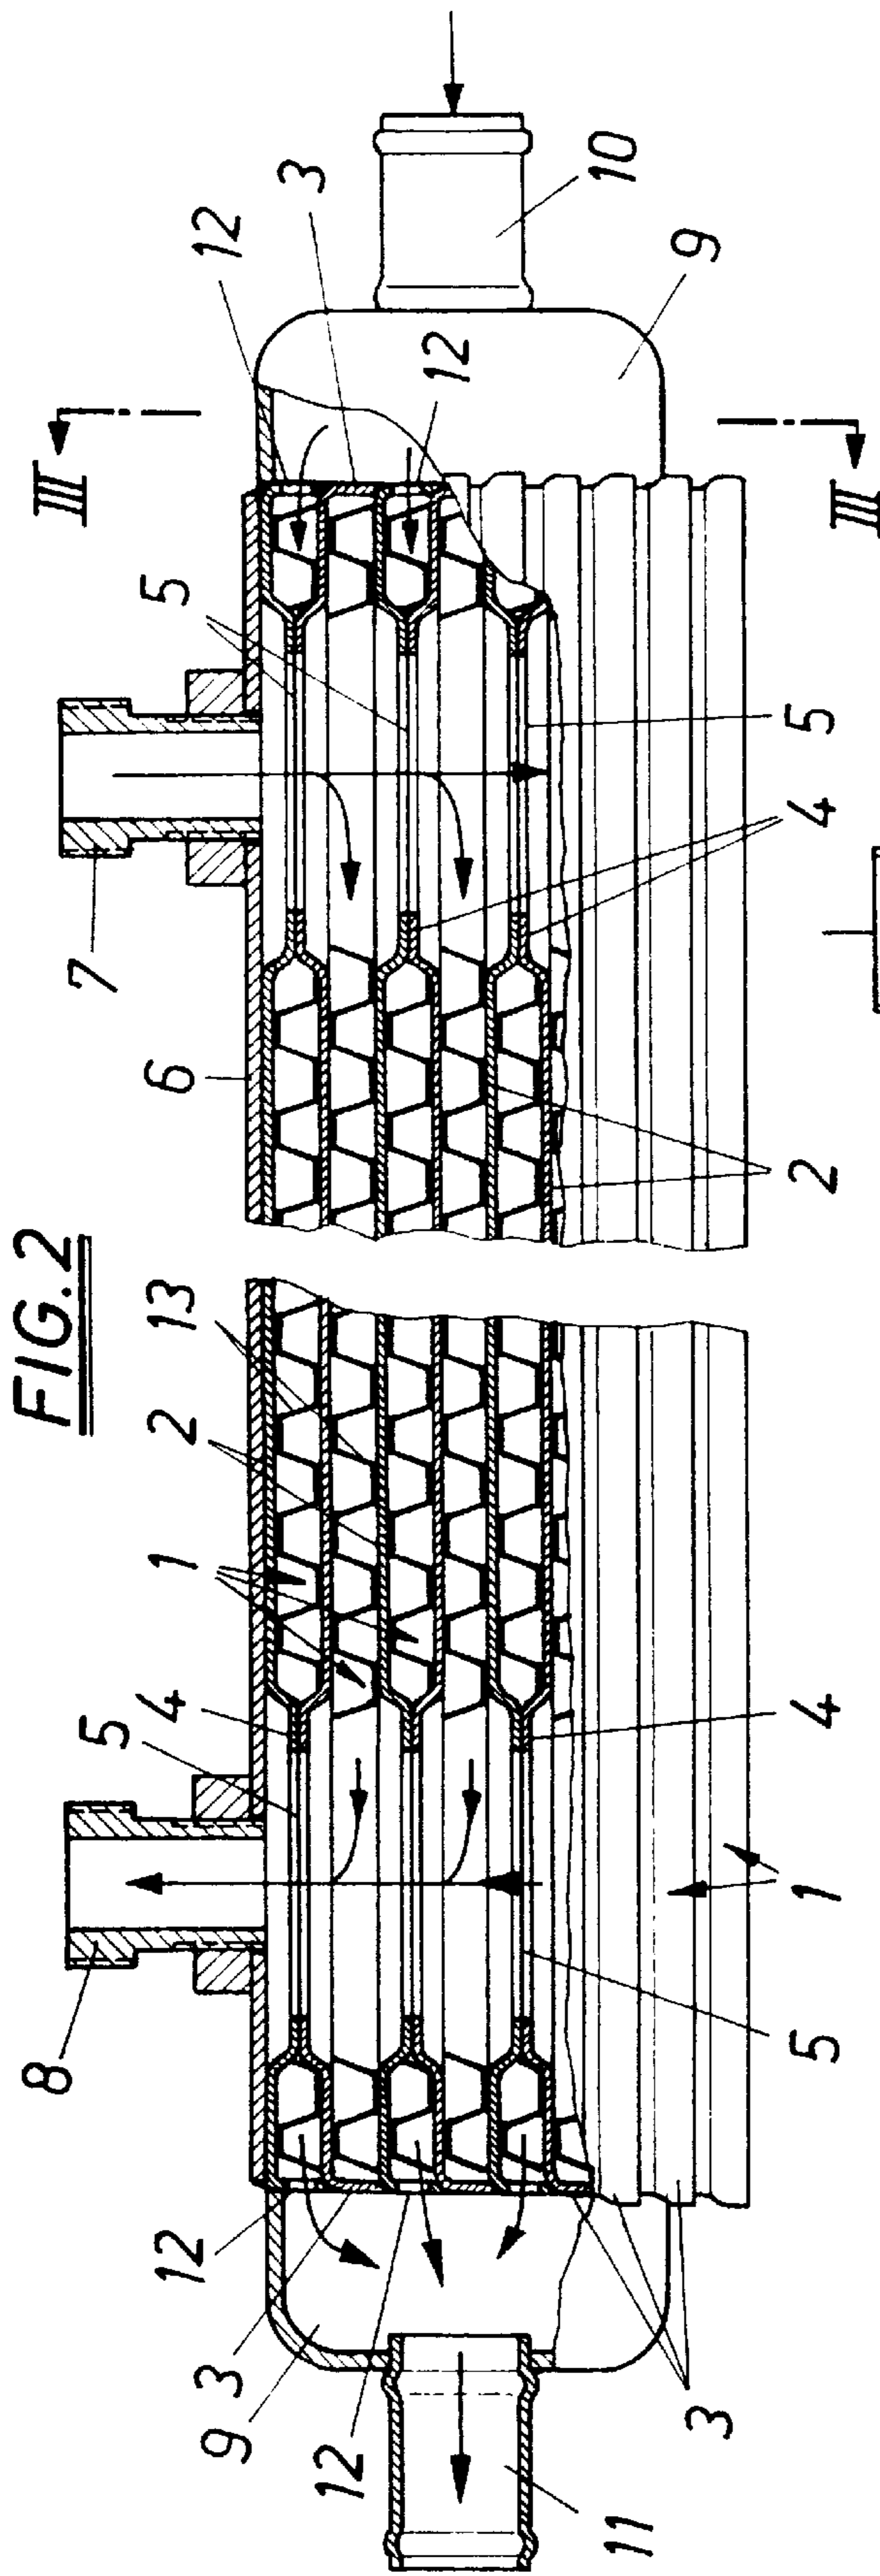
PLATE-TYPE HEAT EXCHANGER, IN PARTICULAR OIL COOLER
